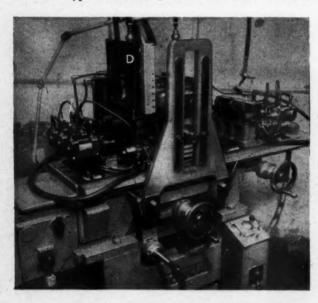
This Somua horizontal milling machine is installed in the Wolverhampton works of Lang Pneumatic, Ltd., and is fitted with twin air-operated fixtures for plunge-milling operations on cores for solenoid-operated reversing valves
